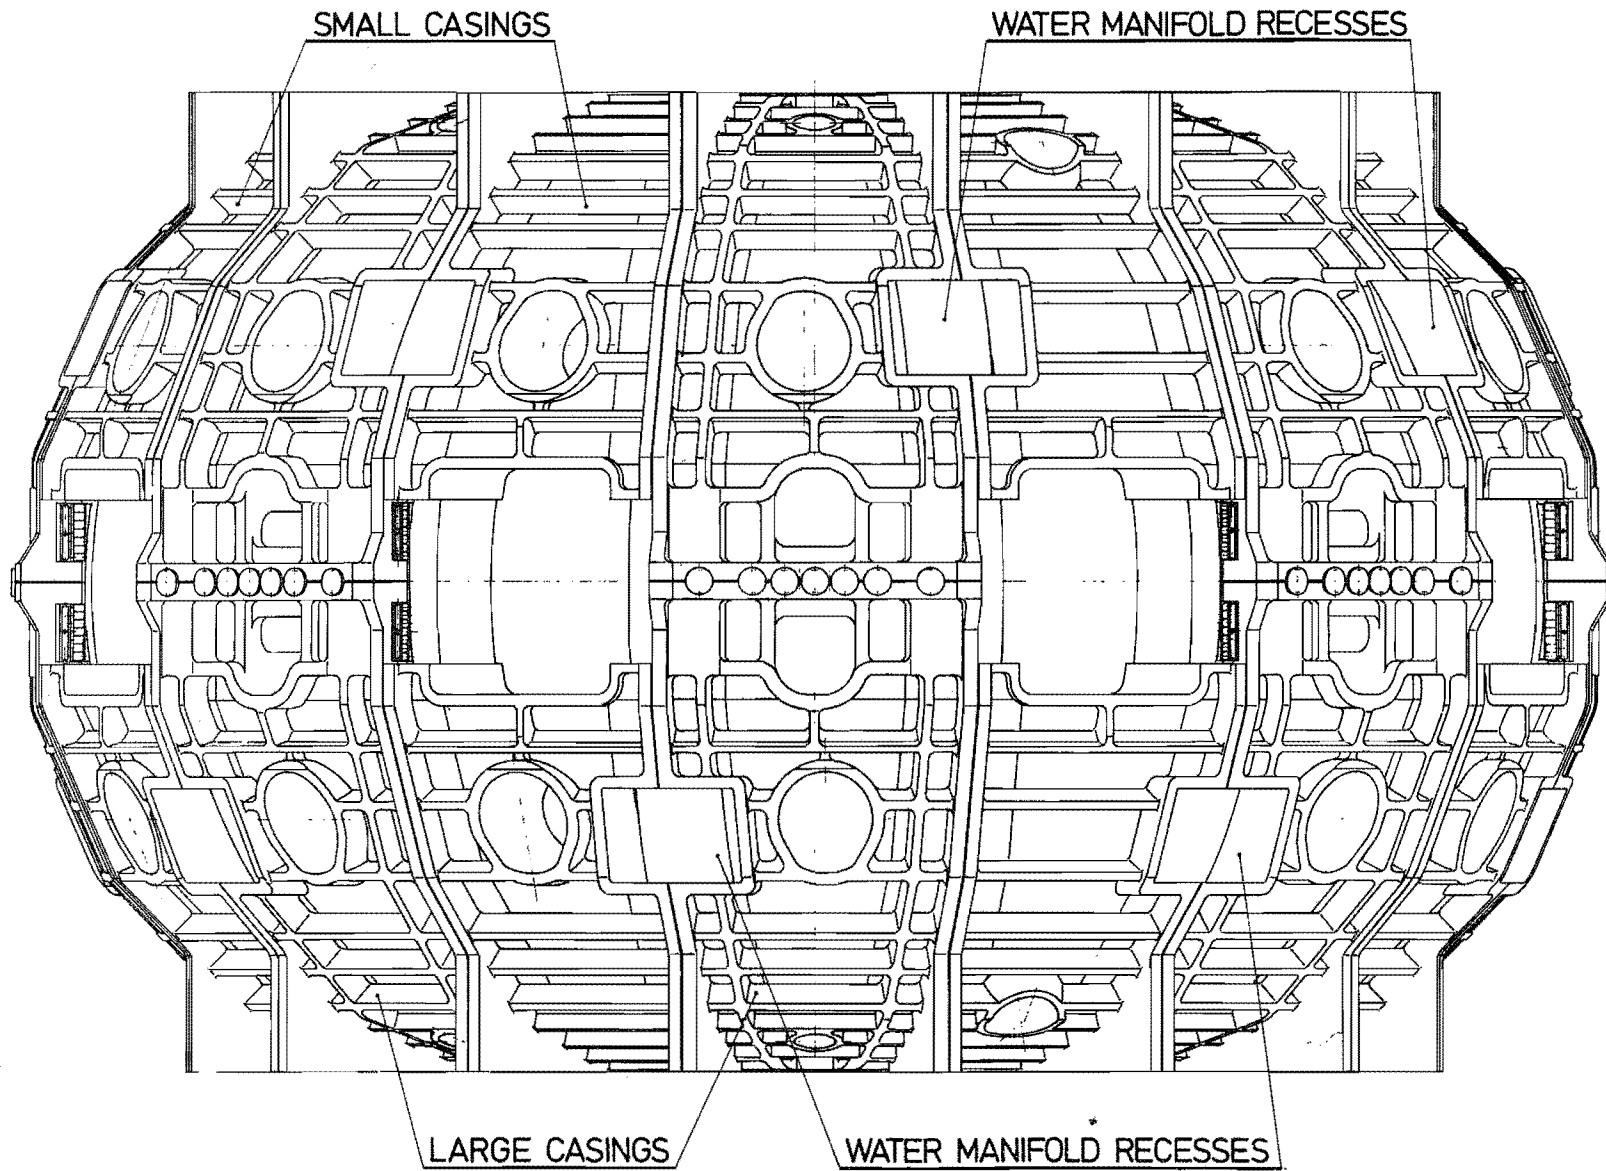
1. 3: Access openings and water manifold recess of the turnover structure.
